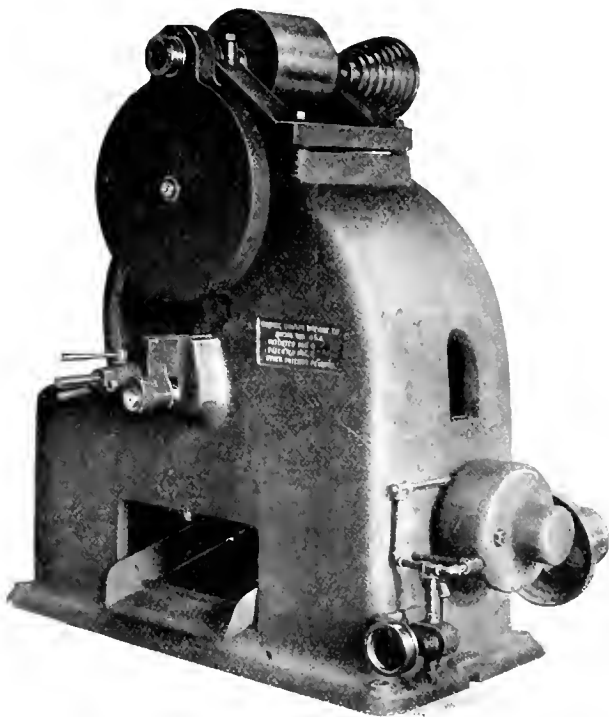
Rear View of Machine, showing Feed Works, Chip Chute, Etc.
